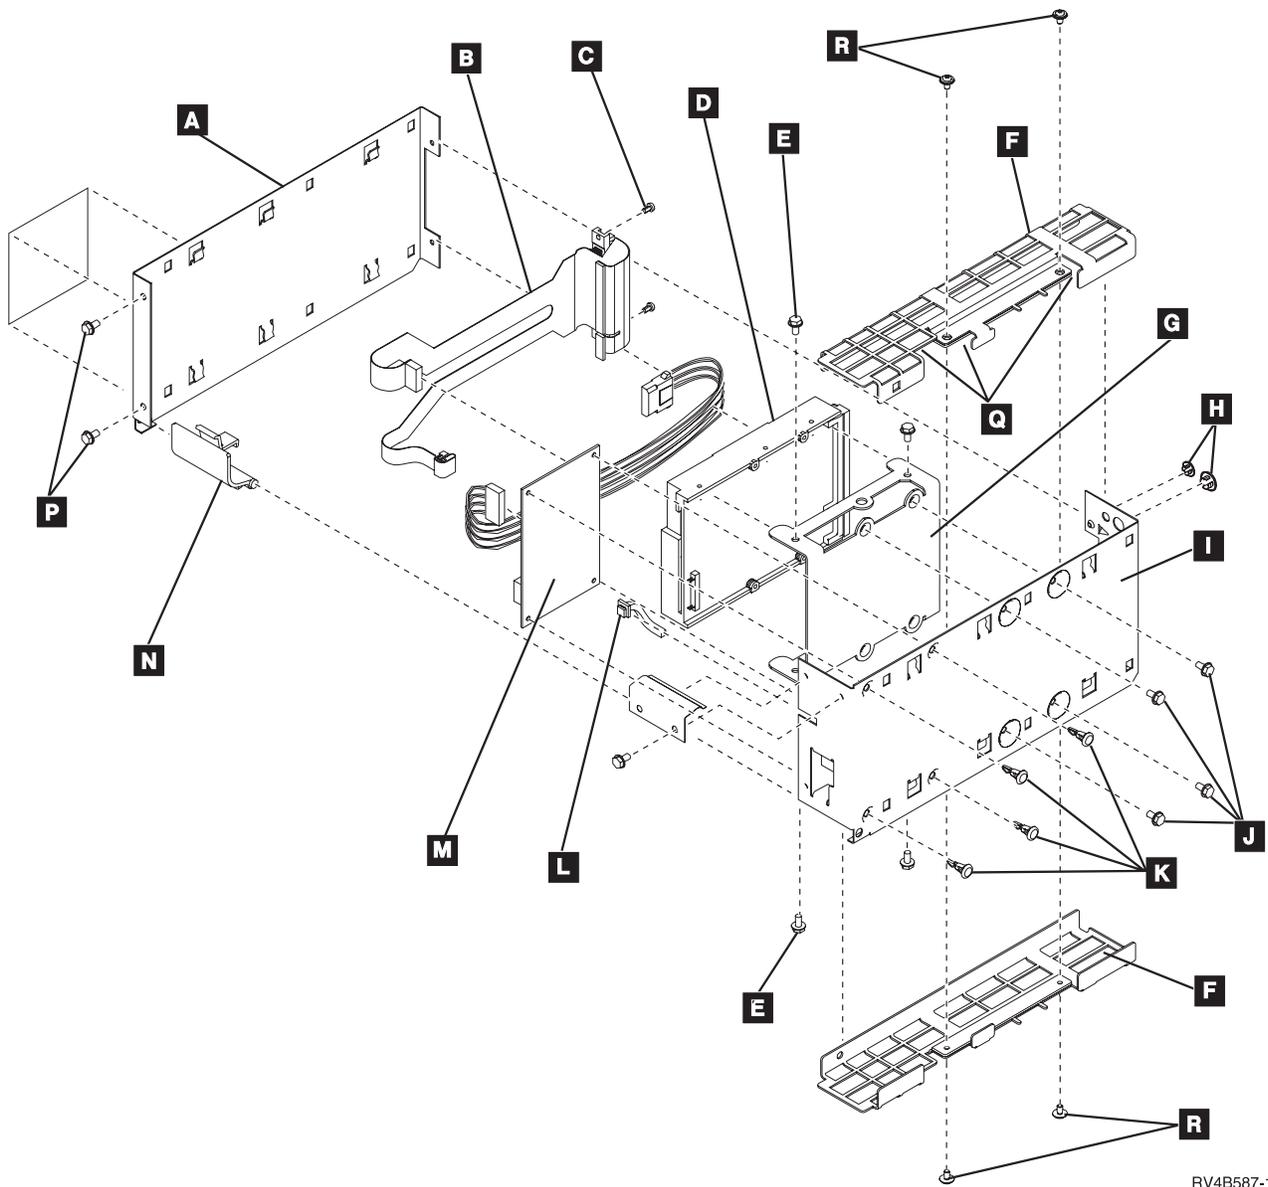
Old style disk unit tray assembly for the 6602 type disk.
